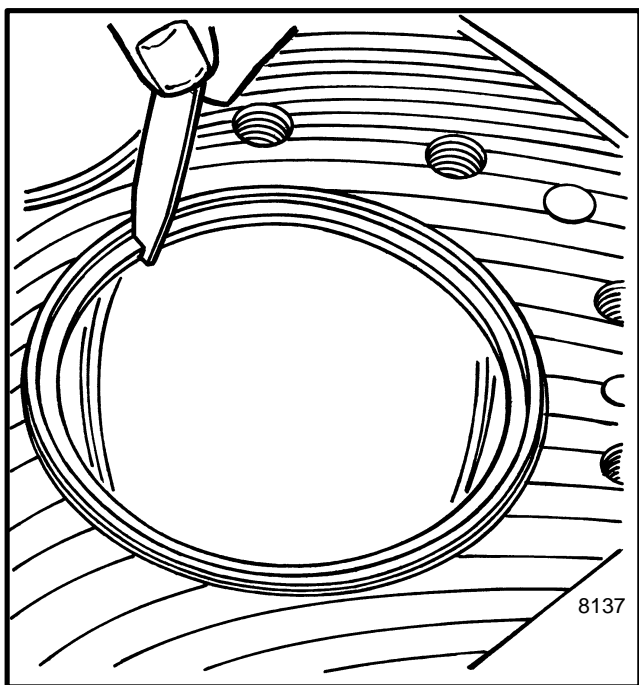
CHECKING THE CLEARANCE AT THE ENDS OF THE PISTON RINGS
